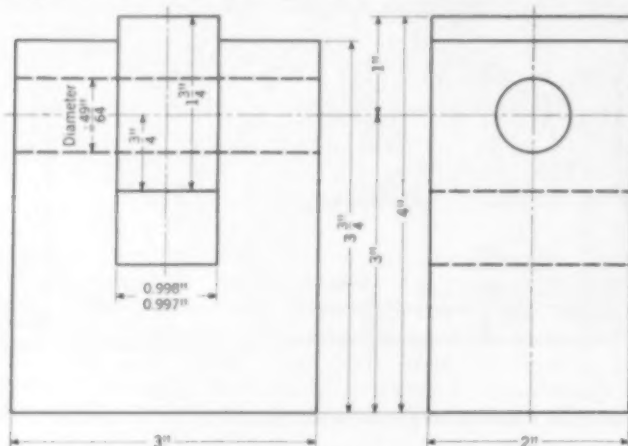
STEEL FIXTURE DESIGNED TO HOLD RODS WHILE THEY WERE BEING SHEARED
